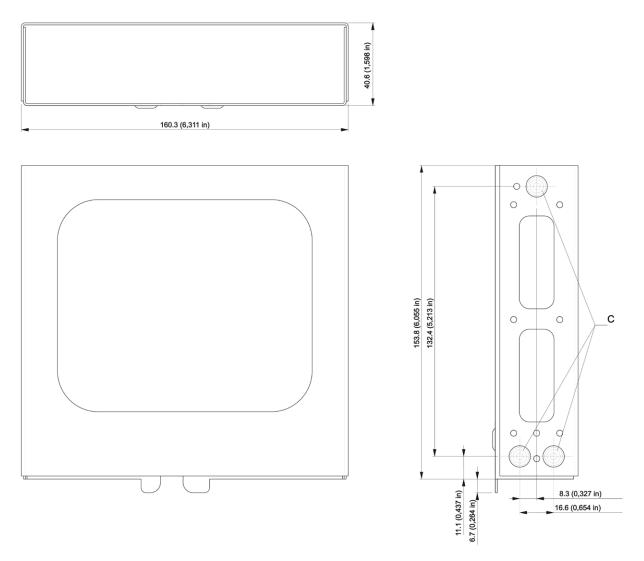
AR6203 mounting kit MK6403-1, dimensions in mm and (inches)
